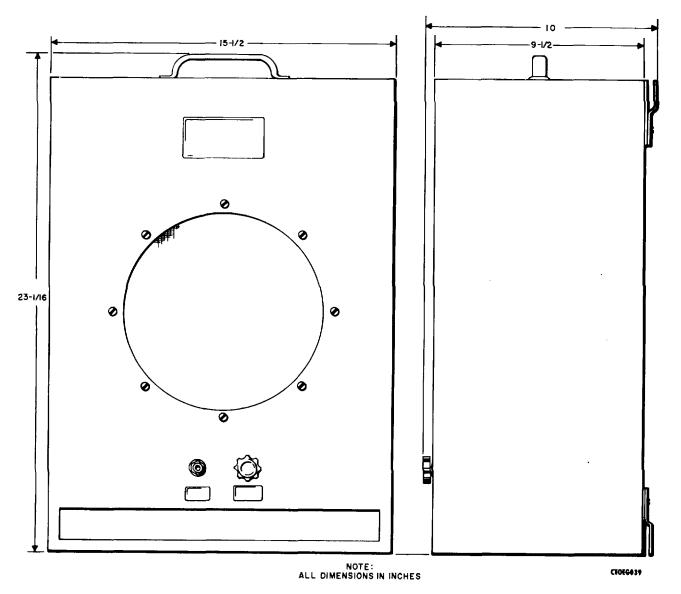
Permanent Magnet Loudspeaker LS-451/G, Dimensional Drawing.
